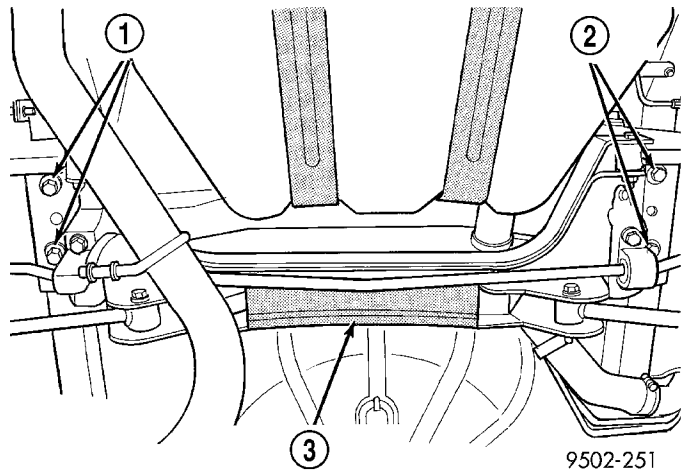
Suspension Crossmember Attachment To Frame Rails
